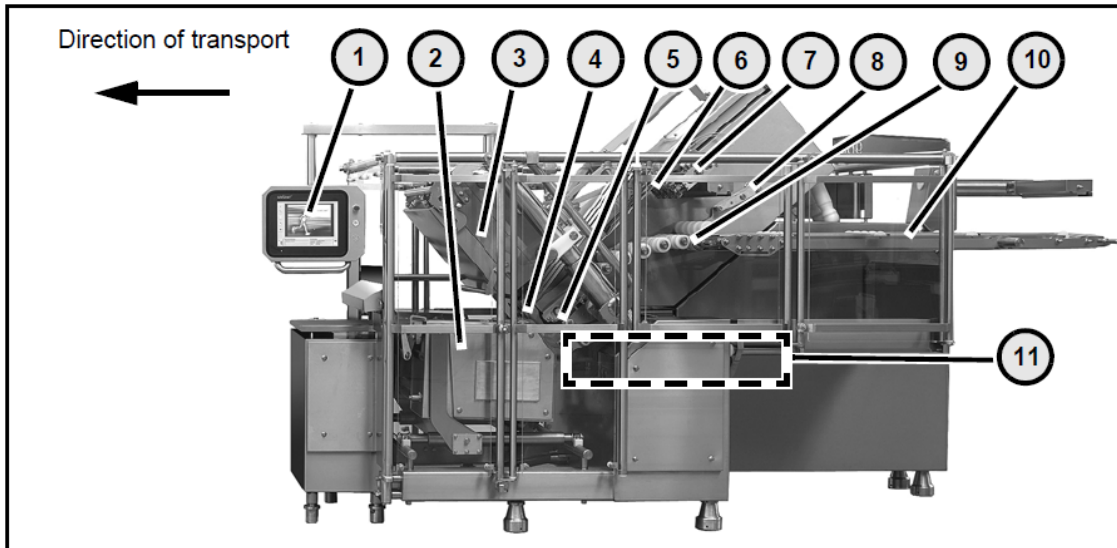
Machine overview (for product lengths exceeding 1200 mm)
